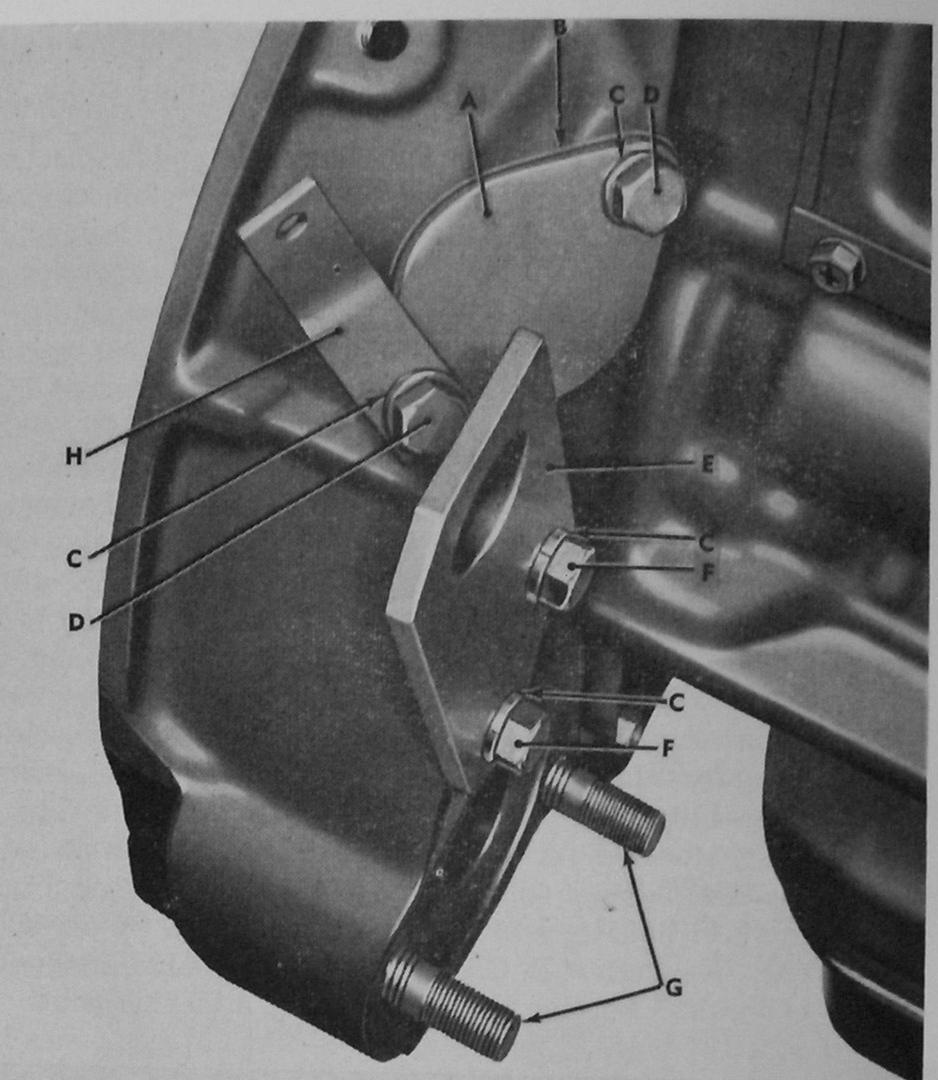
Flywheel housing front half installed—engine assemblies 7411599 and 8329440 shown.
